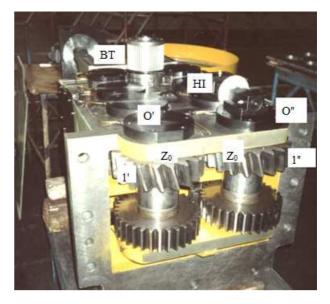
Anti-backlash system used in a vertical lathe having the possibility of machining workpiece with the maximum diameter of 8000 mm.
